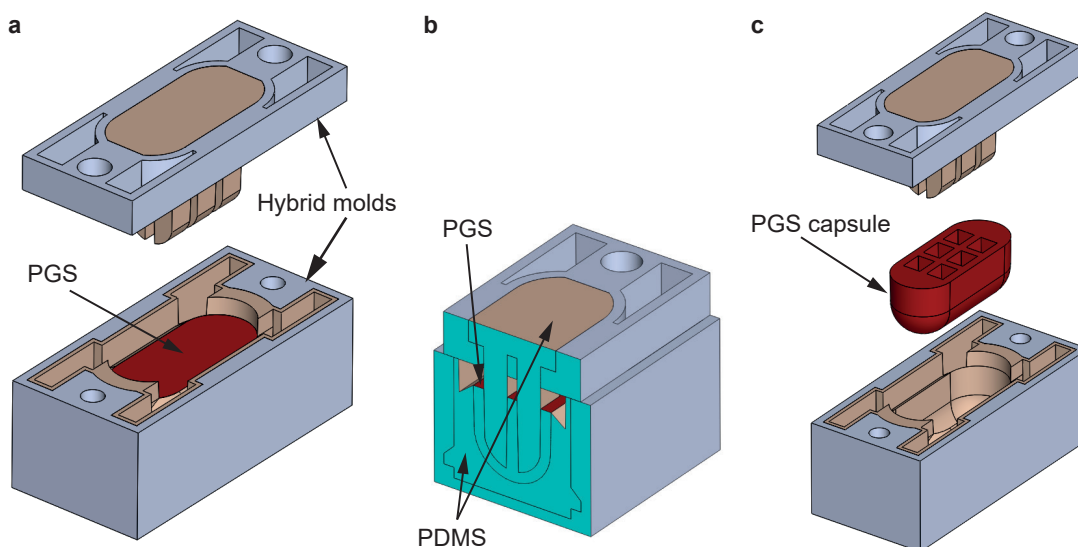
PGS and POMaC molding. a,b,c, Molding of PGS or POMaC in the hybrid molds fabricated in Figures 4.9 and 4.10. Hybrid molds filled with PGS before closing the molds (a), after closing the molds (b), and after the opening of the molds (c).
